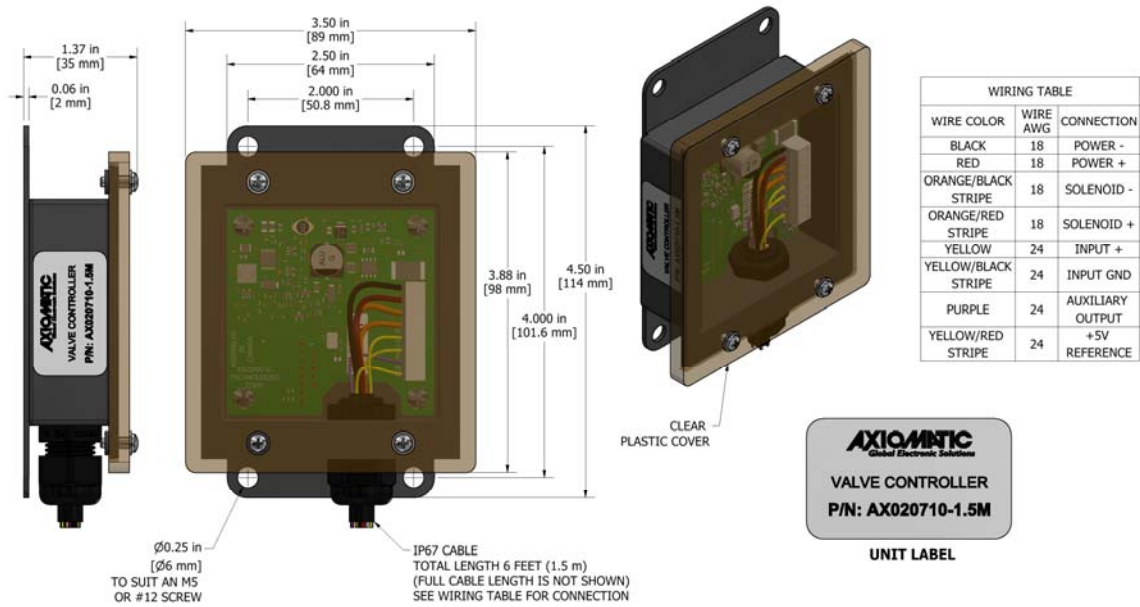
Dimensional Drawing of AX020710-1.5M
